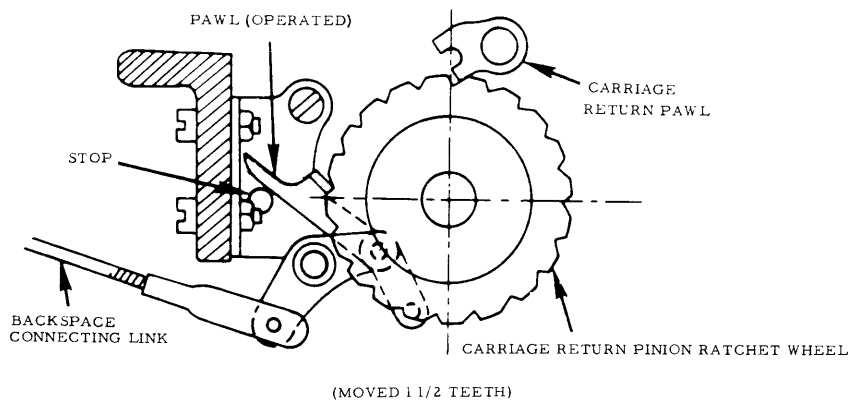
Carriage Return Pawl Engaging Halftooth.
